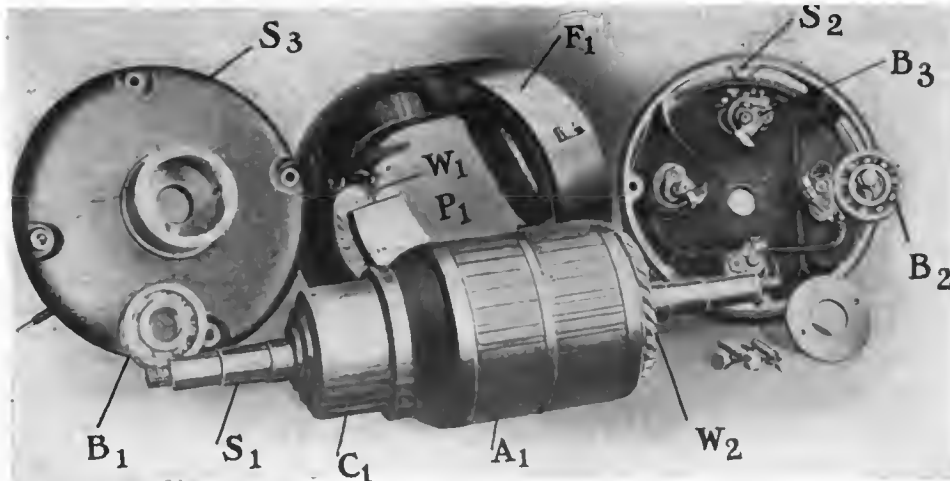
Component parts of motor, presenting slotted armature, ball-bearing spindle, and form-wound laminated fields, all enclosed
